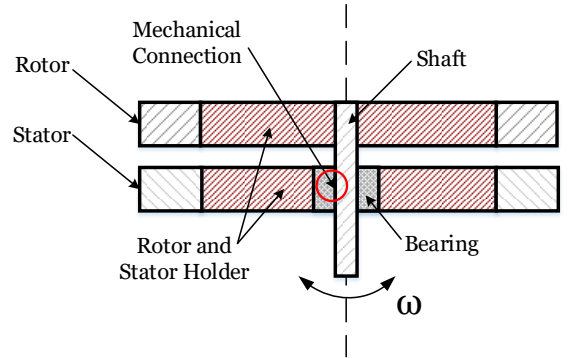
Cross-sectional view of the motor showing the mechanical connection between the rotor and stator
